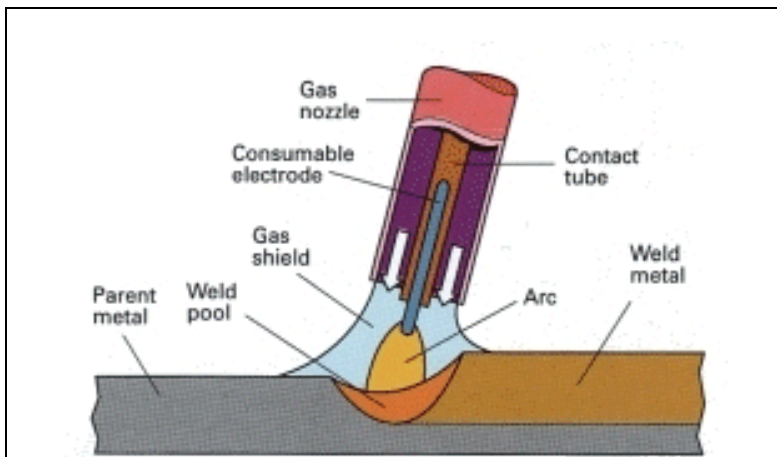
MIG/MAG welding area (picture by Courtesy of TWI Ltd)
